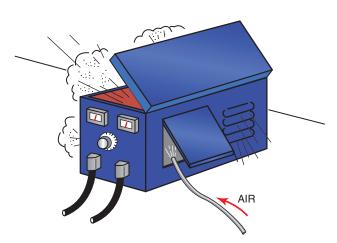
Slag, chips from grinding, and dust must be blown out occasionally so that they will not start a fire or cause a short-out or other types of machine failure.
